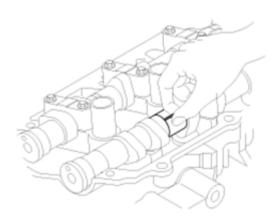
Inspecting Camshaft Journal Clearance Courtesy of KIA MOTORS AMERICA, INC.
